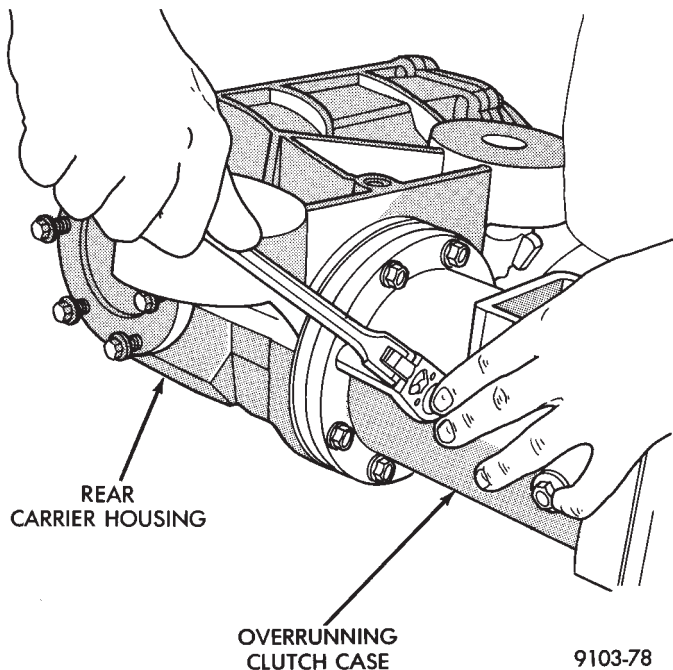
Overrunning Clutch Case to Rear Carrier Bolts
